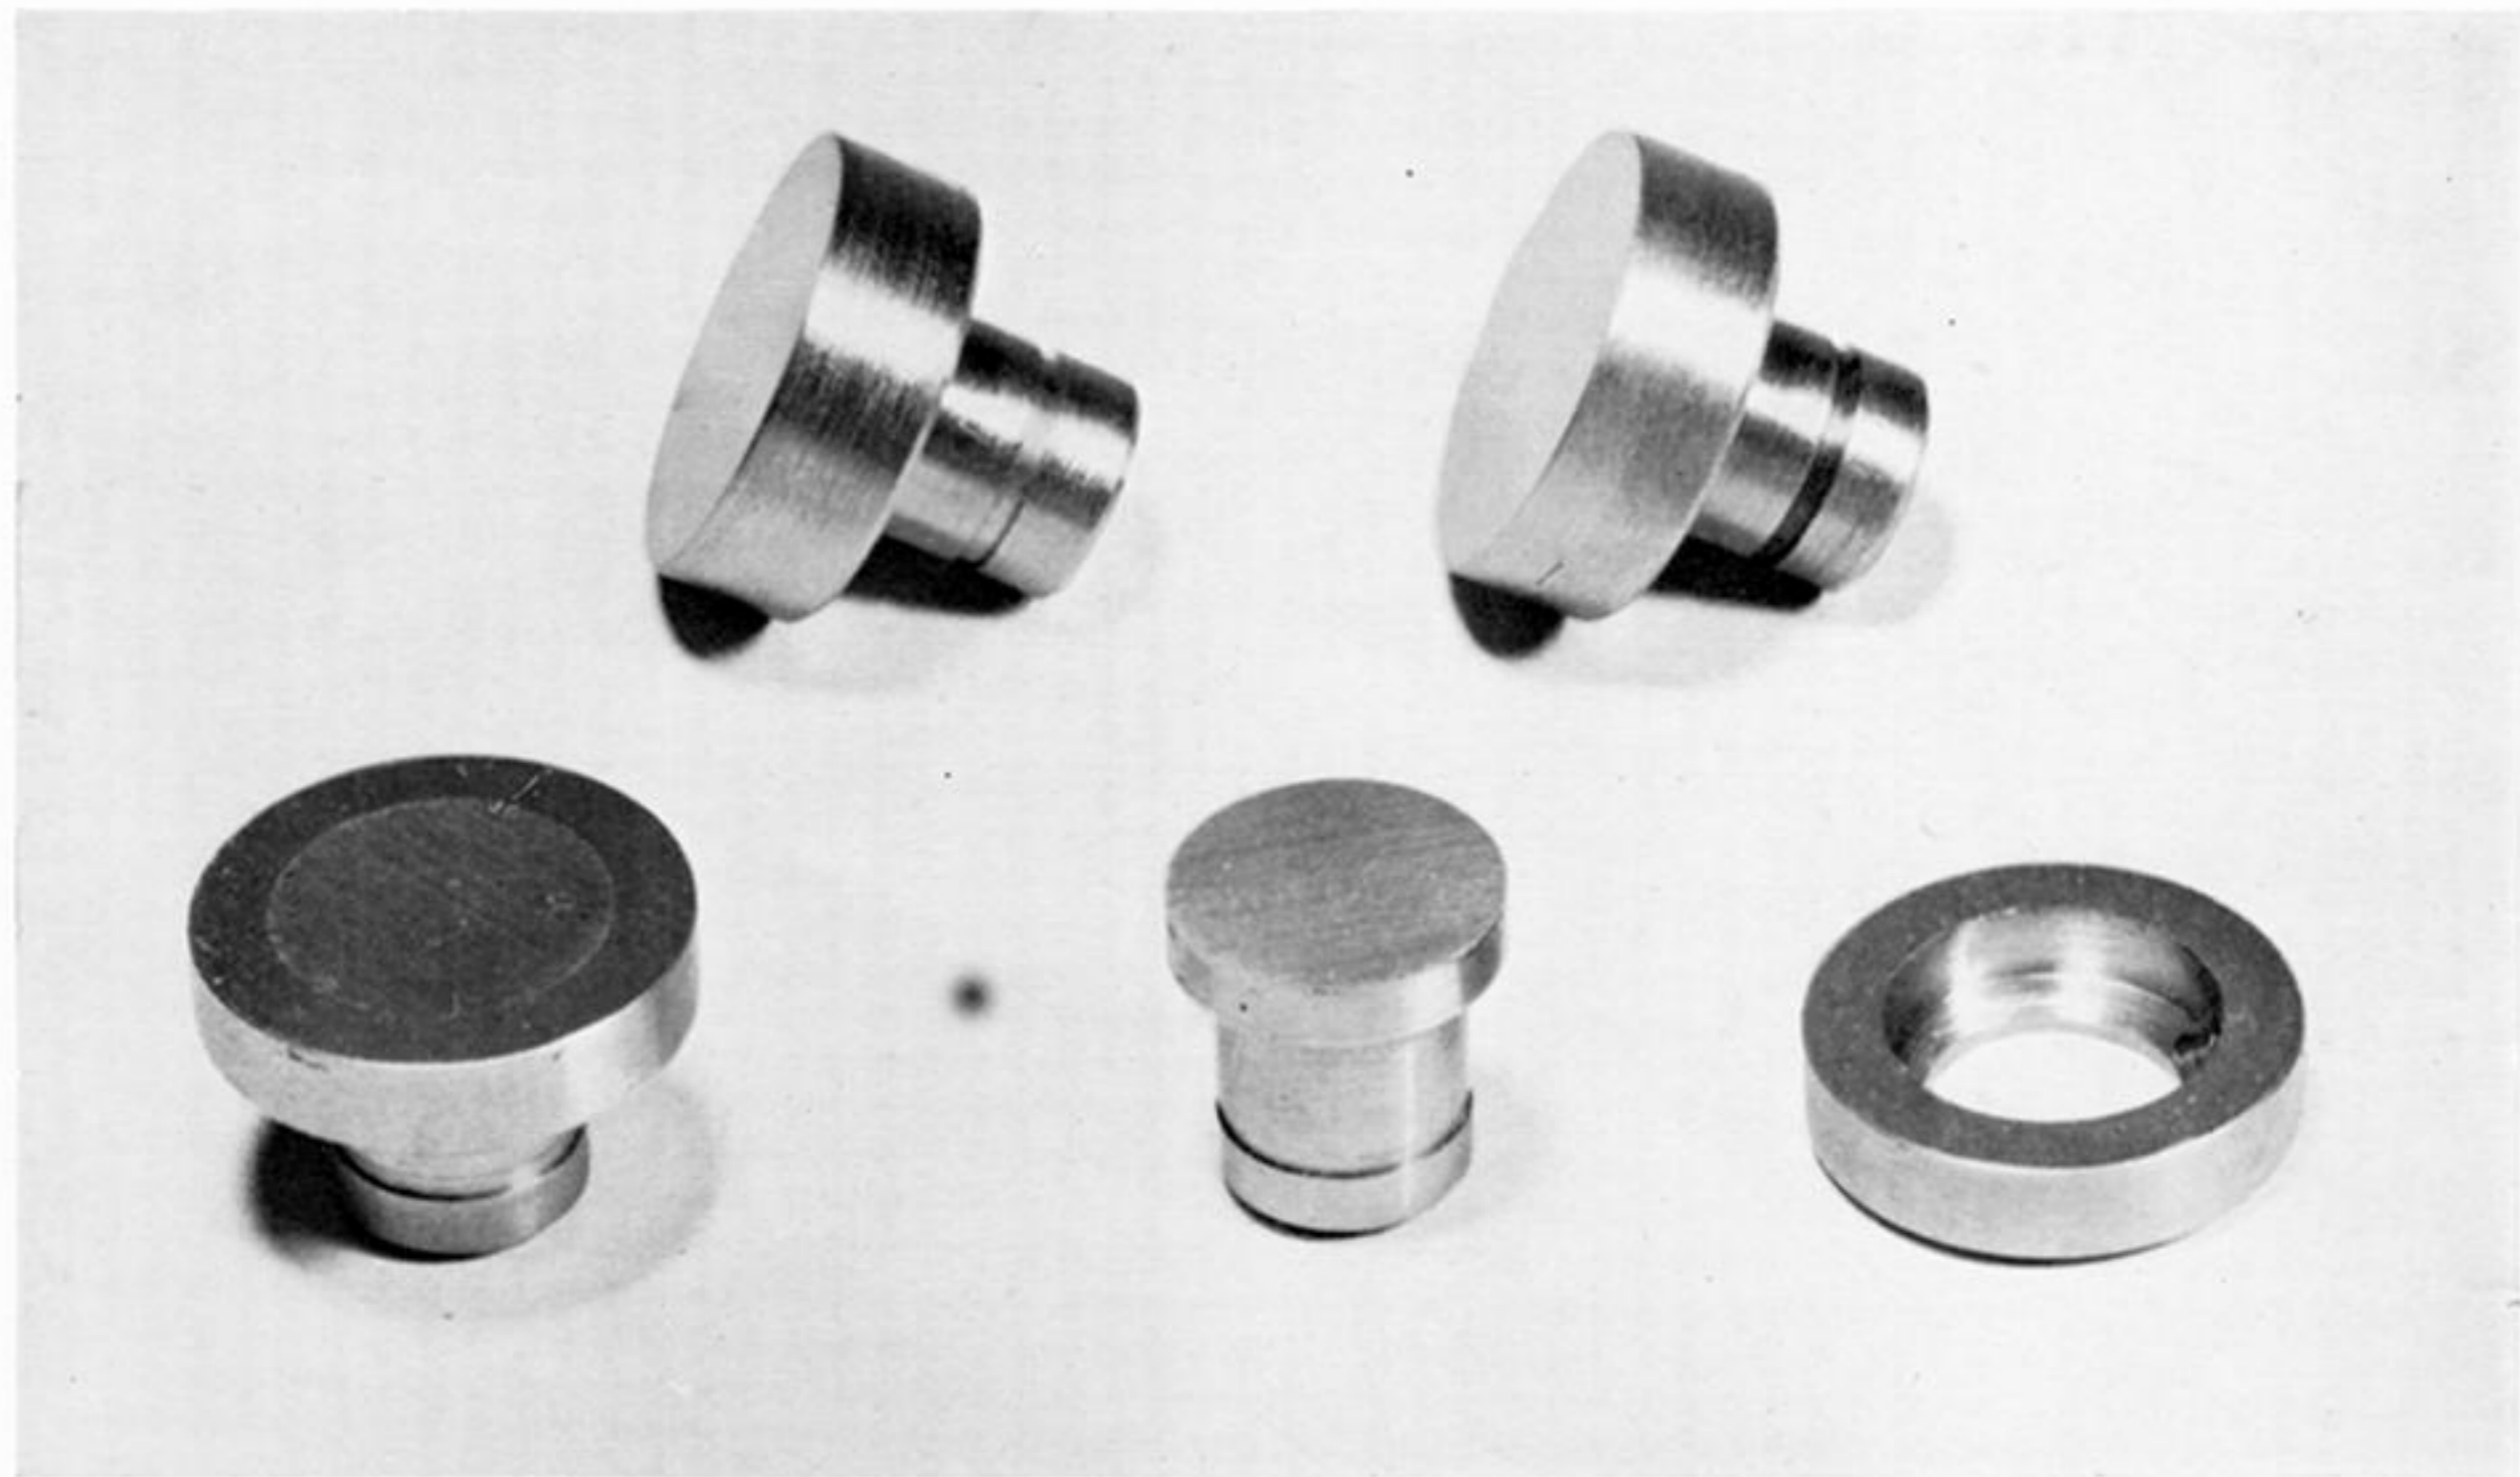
Types of erosion test specimen: (a) specimen with guard ring; (b) one-piece specimen; (c) brazed composite specimen.
